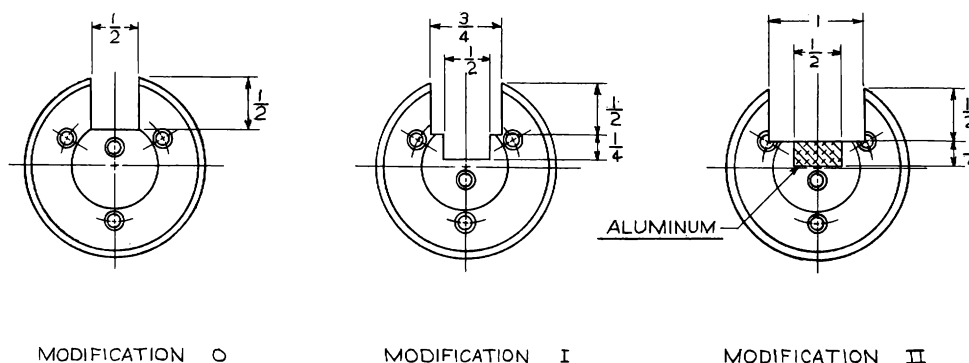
End View of EBR-II Oscillator Rod Mockup (dimensions in inches).
